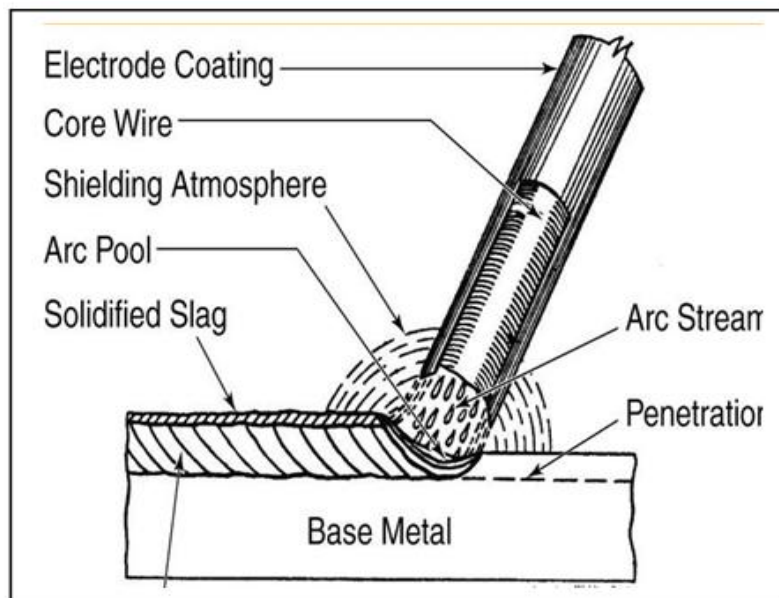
FIG. ARC ZONE IN SHIELDED METAL ARC WELDING (SMAW)
